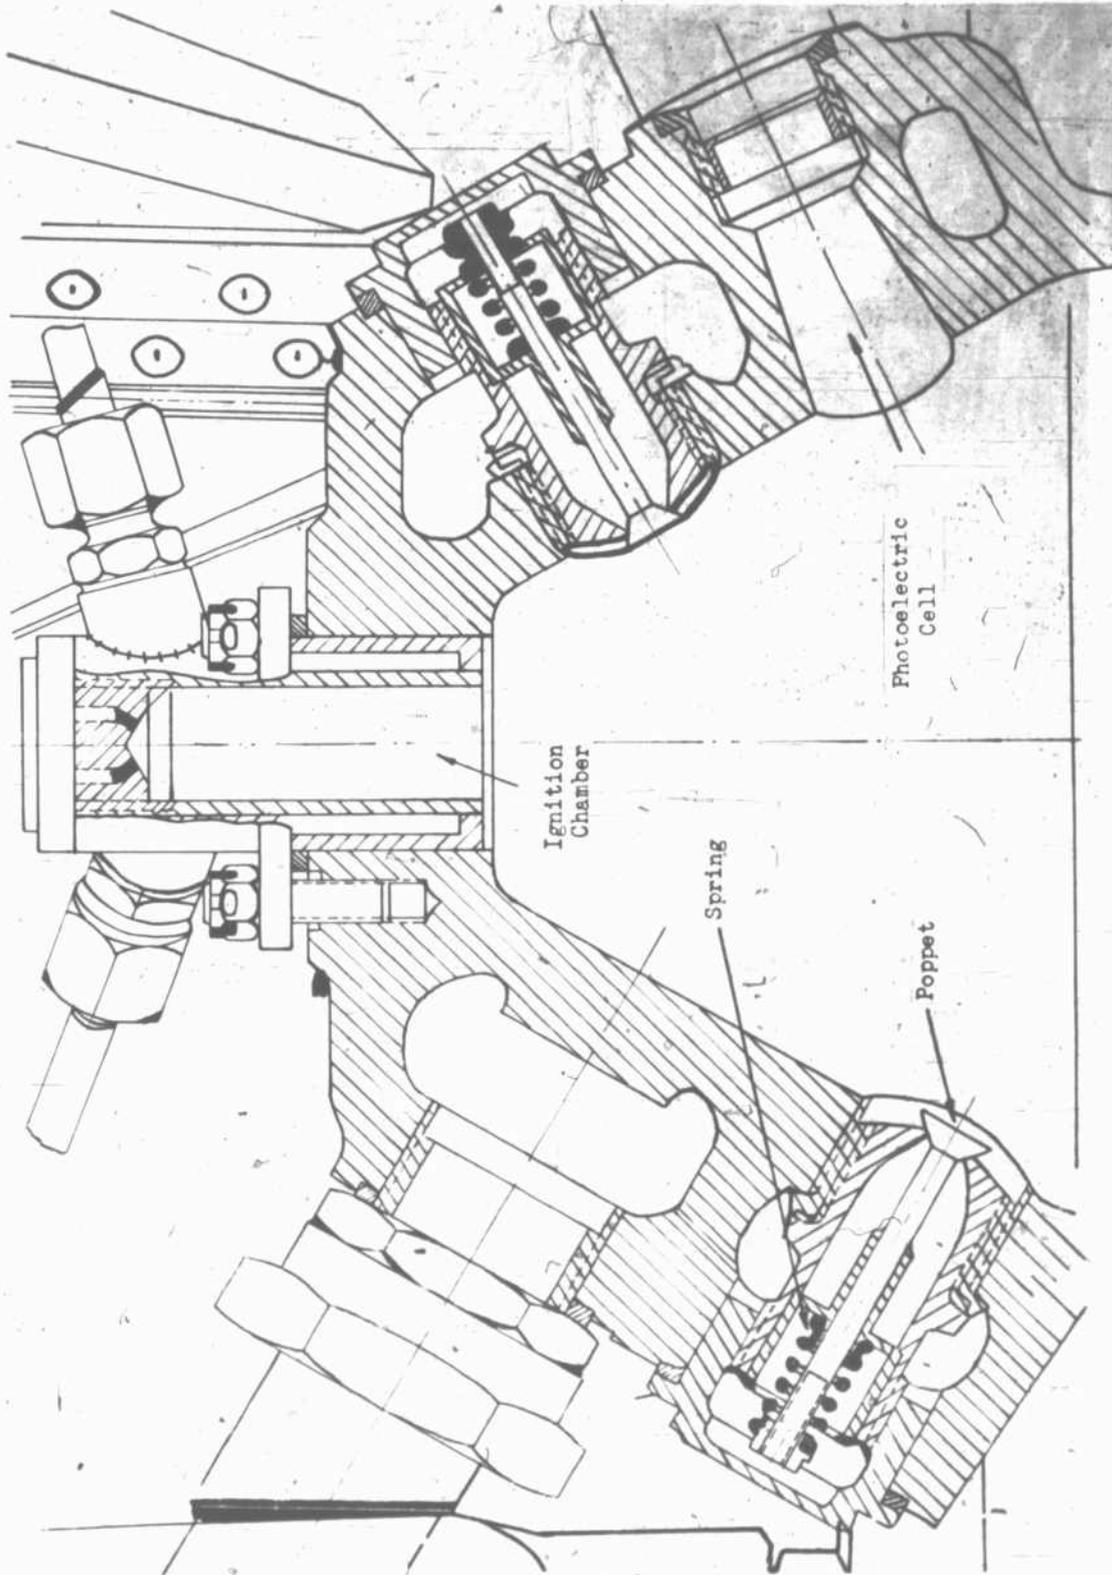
Head of Combustion Chamber P 3390A Showing Injector
